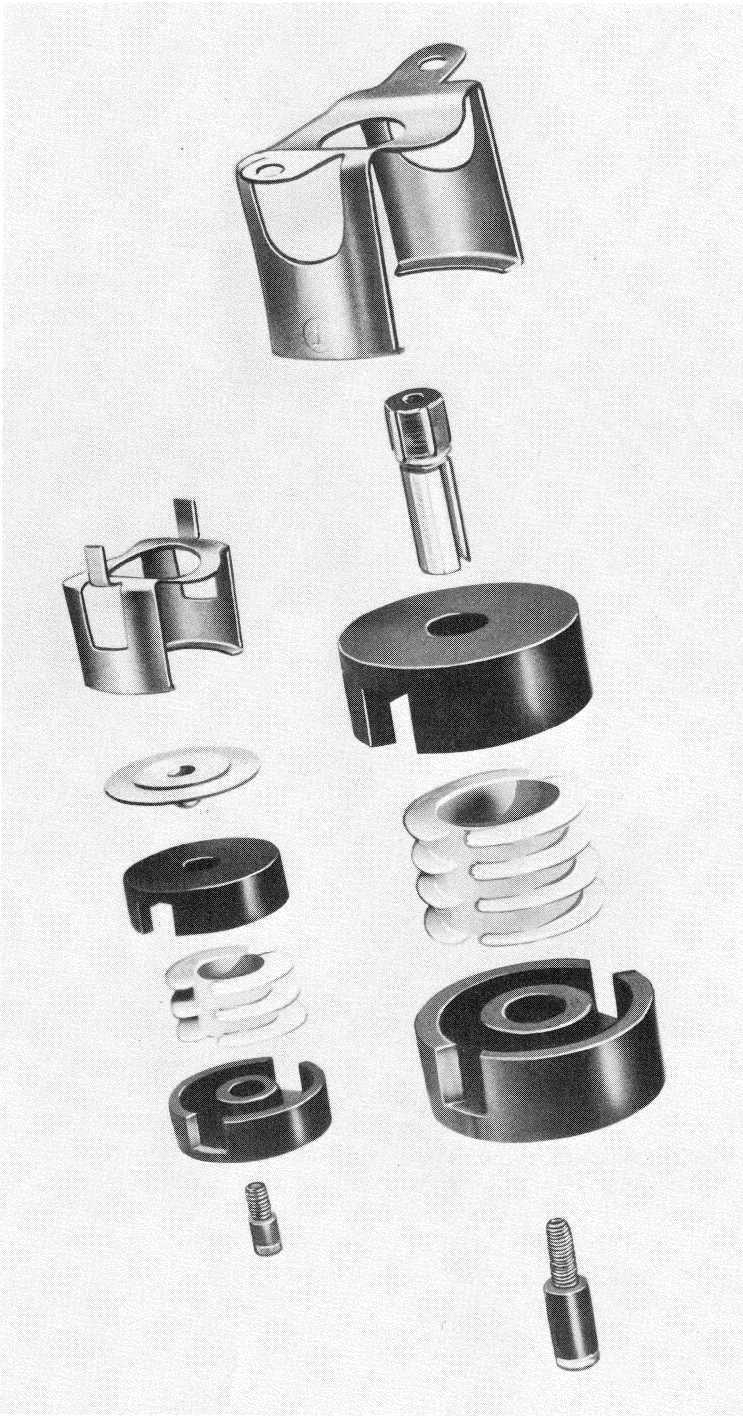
A typical pot core assembly. (Photo courtesy of Magnetics, Division of Spang & Co., Butler, PA.)
